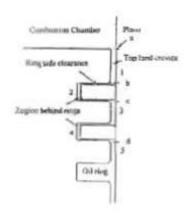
Schematic of typical production spark ignition engine and ring assembly showing gas flow path [6]
